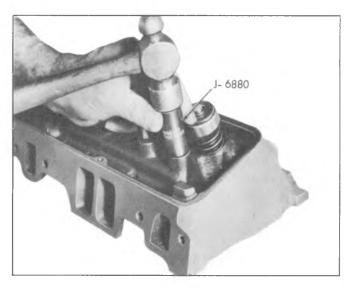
A-26--Installing Rocker Arm Stud (Typical)
